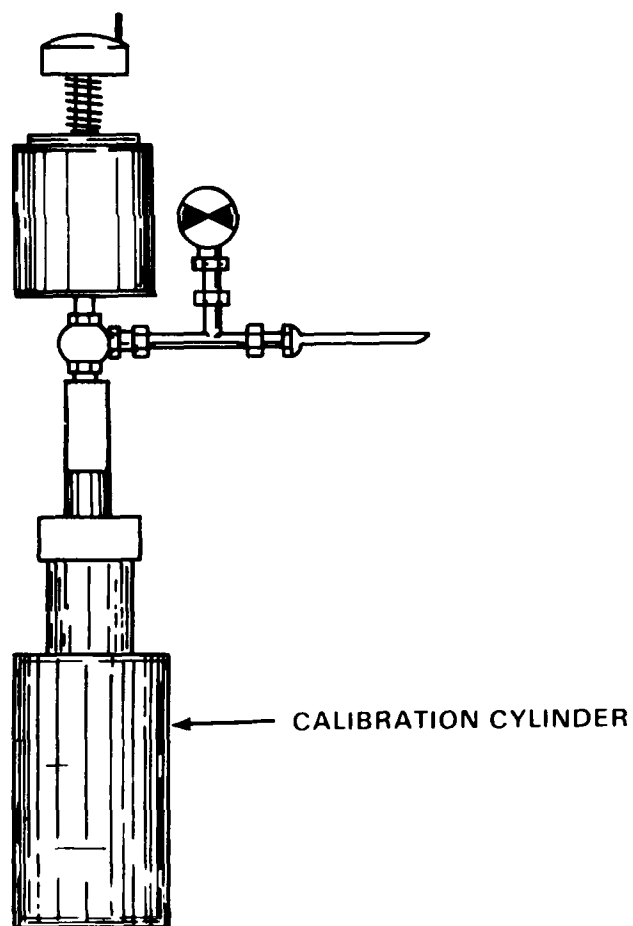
ULLAGE INSPECTION FIXTURE INSERTED IN THE CALIBRATION CYLINDER.
